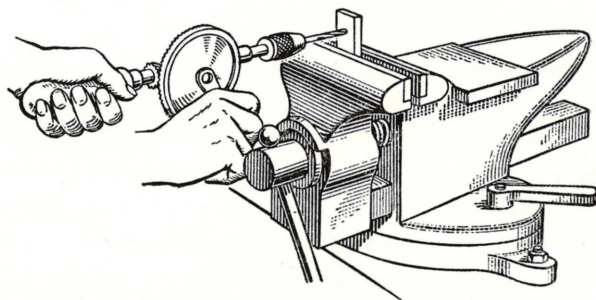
The size of the hole to be drilled will depend on the size screw to be used
